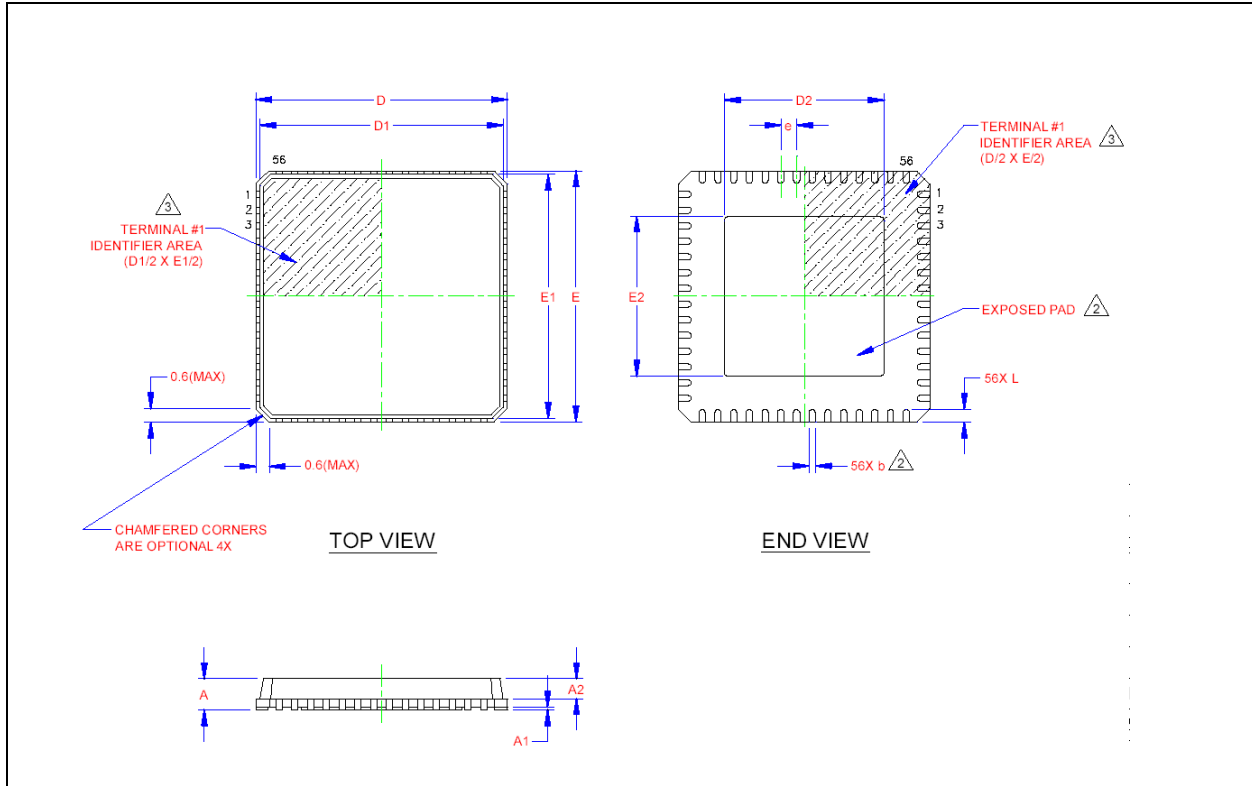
USB3500-ABZJ 56 Pin QFN Package Outline, 8 x 8 x 0.9 mm Body (Lead Free)
